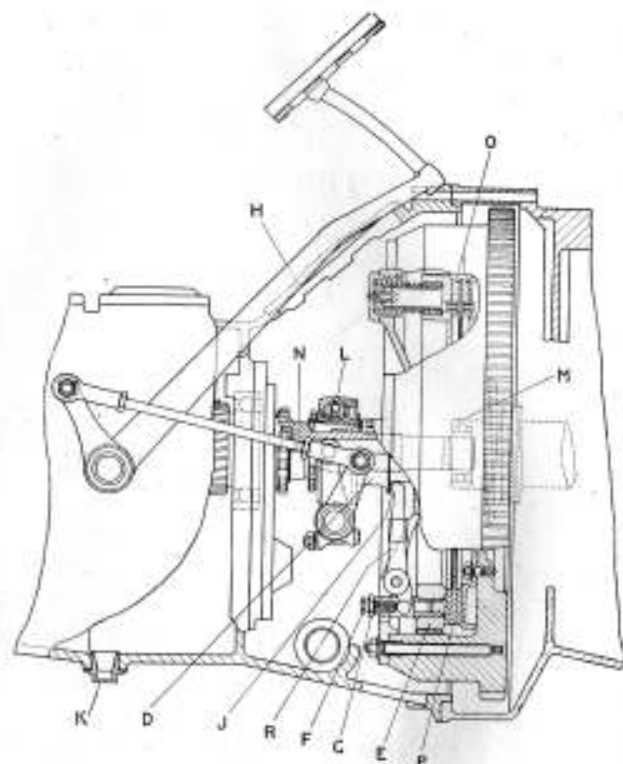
PART SECTIONAL VIEW OF CLUTCH.
